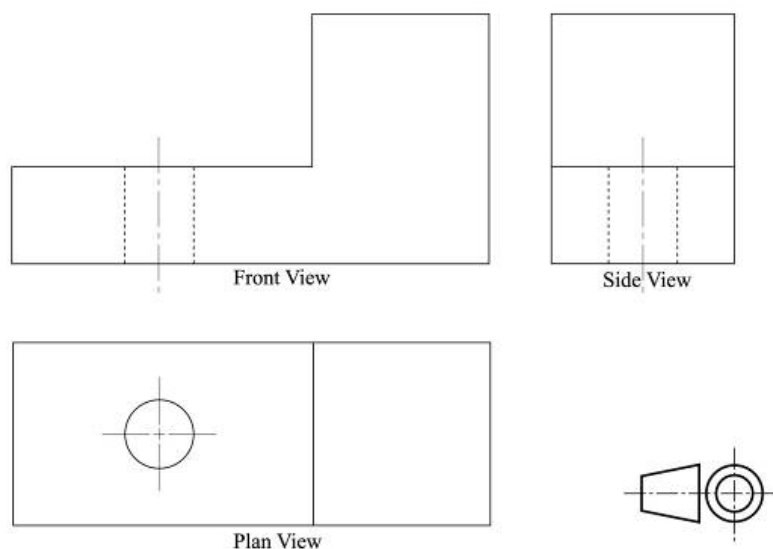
First angle orthographic drawing of 'L' shape design block
